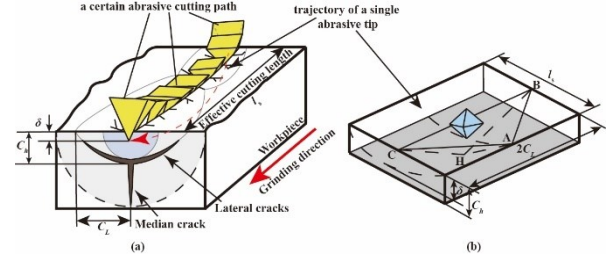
Schematic illustration of material removal process in brittle fracture mode in UVG. (a) Microscopic view of grinding process, (b) The volume of brittle fracture material removal by single grit.
